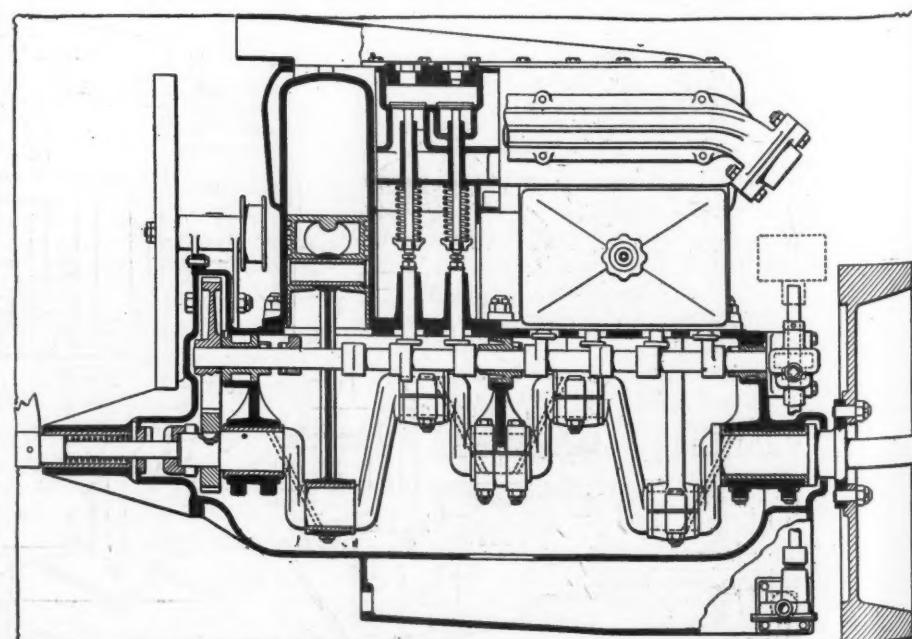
SIDE SECTIONAL VIEW OF WISCONSIN BLOCK MOTOR
